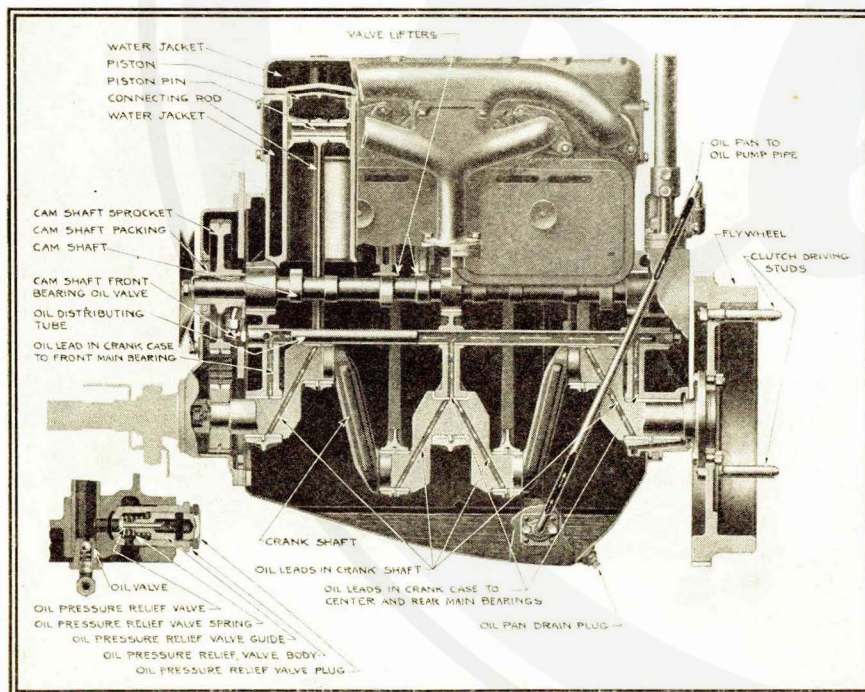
Complete Oiling System and Oil Pressure Relief Valve
